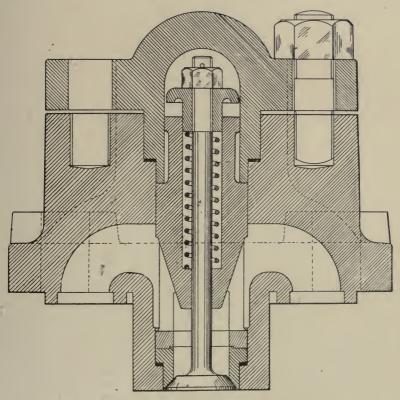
SUCTION VALVE CO2 REFRIGERATING MACHINE.
